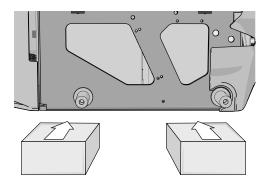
Use two blocks on each side of the chassis. The wheels have been removed in this figure for a better view.
